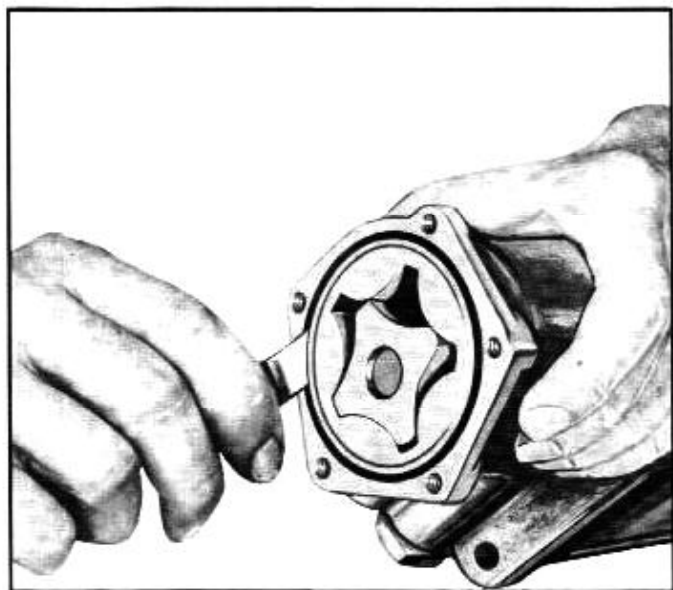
A-98—Checking Outer Rotor to Pump Body Clearance
